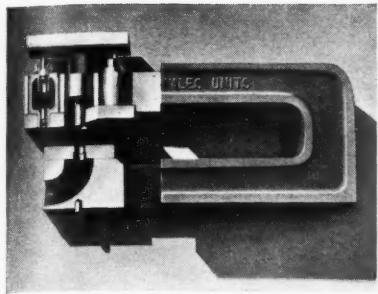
Cut-away view of Wales "Hydra-Strip" hole punching unit showing two "Hydra-Springs," one on each side of the punch
